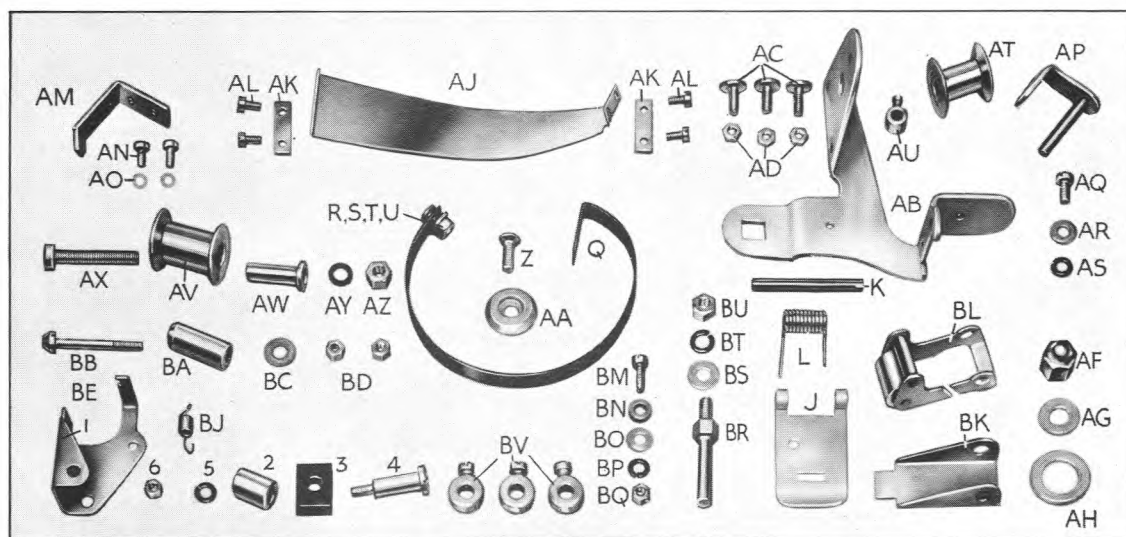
TAPE ROLL HOLDER COMPONENTS
